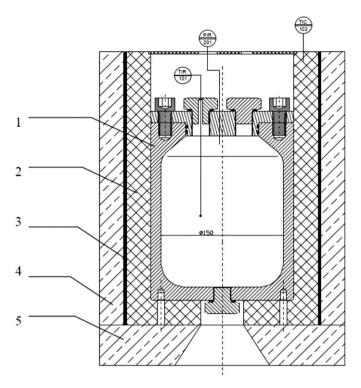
Sectional view of the ignition vessel: 1) steel vessel walls -2) aluminium coat -3) heating jacket -4) insulation -5) base plate.
